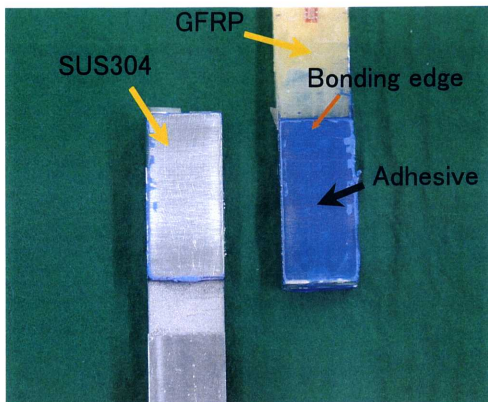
Fracture surface of adhesive joints degraded at 65 °C and 85 % for 298 hours.
